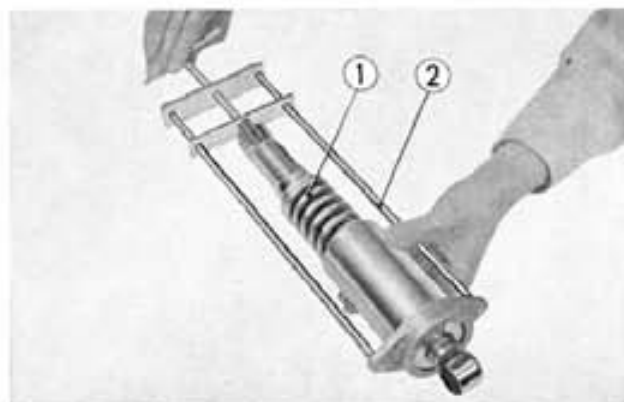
① Rear cushion spring ② Rear cushion disassembling tool
